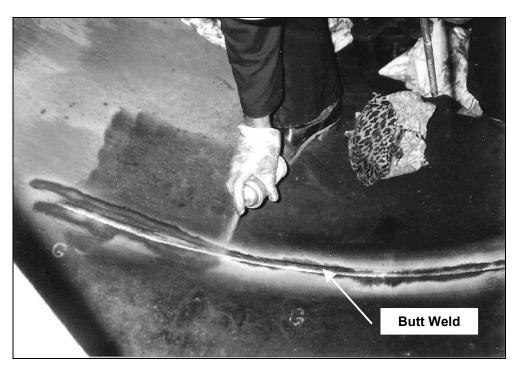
Liquid Penetrant Inspection of Transverse Butt Weld from the Interior of the Tank Car
